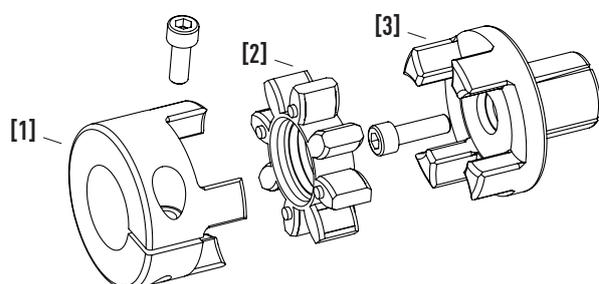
Coupling assembly variant 1: clamping hubs with one clamping screw
